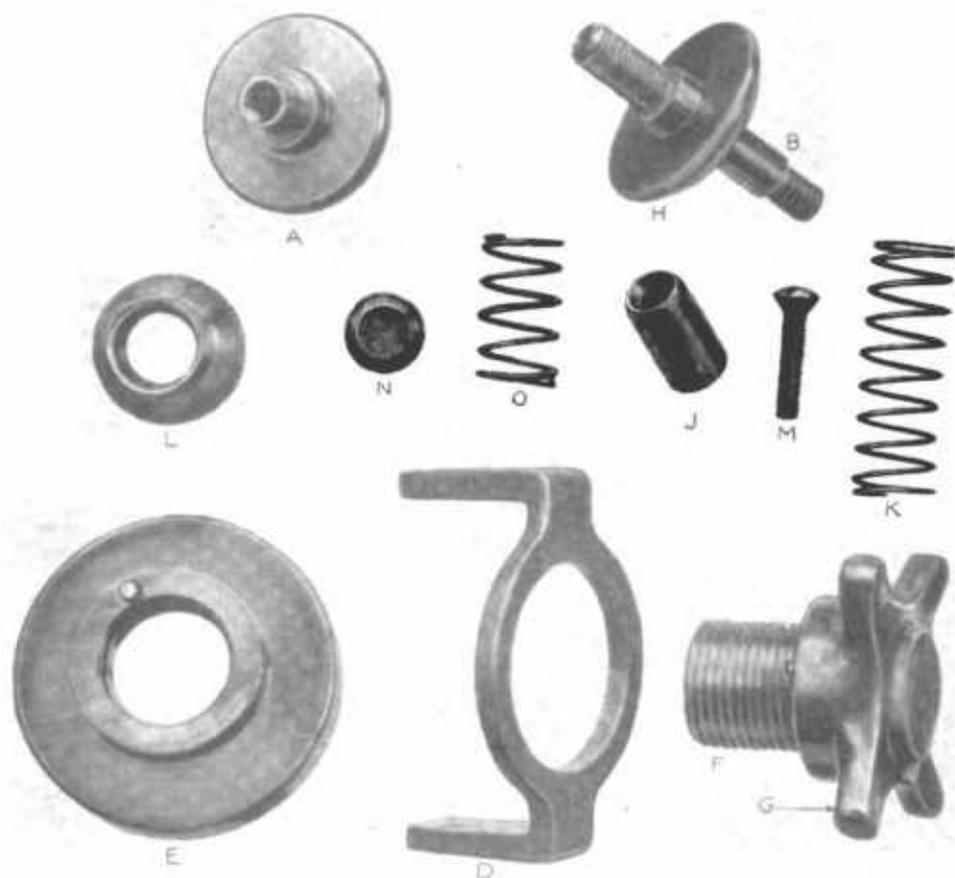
A.—Helmet, air-regulating escape valve, disassembled.
